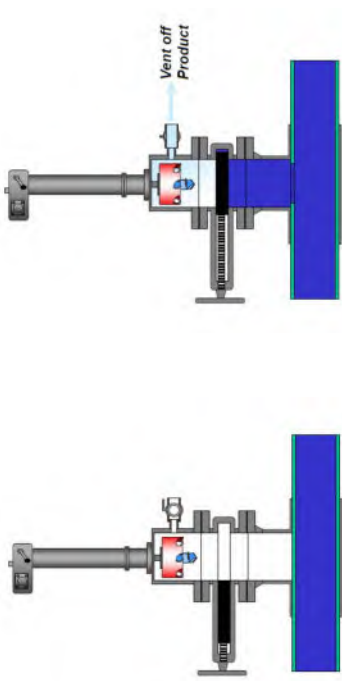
Illustrate the installation of tapping machine on tapping valve (left), and Relieve trapped pressure through bleeder valve after tapping valve is completely closed (right).
